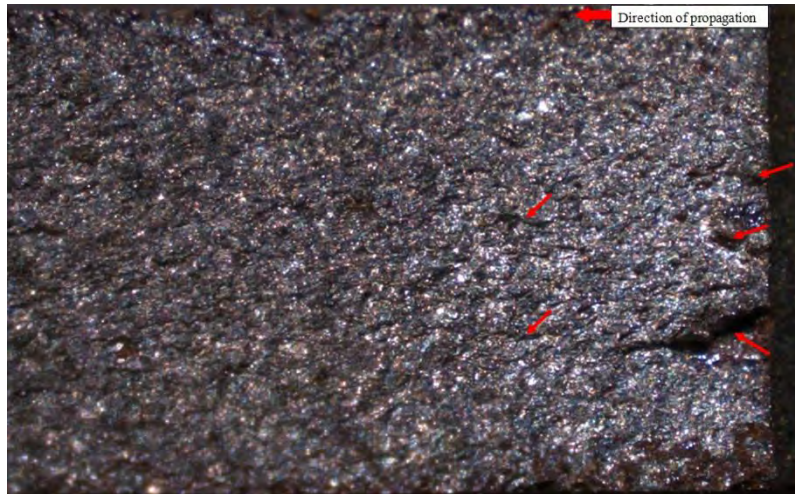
The fracture surface of CT specimen at 10x magnification. Microcracks indicated by arrows.
